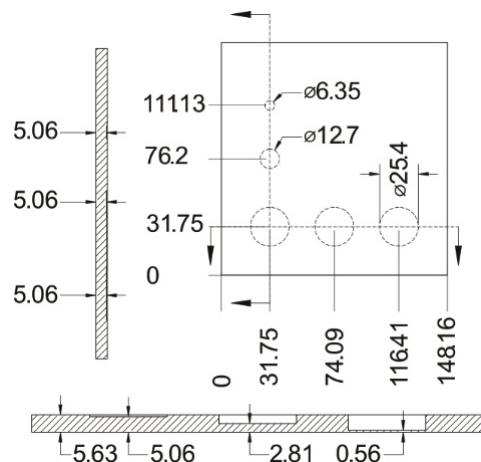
Technical drawing of the panel. Dimensions are given in millimetres.
